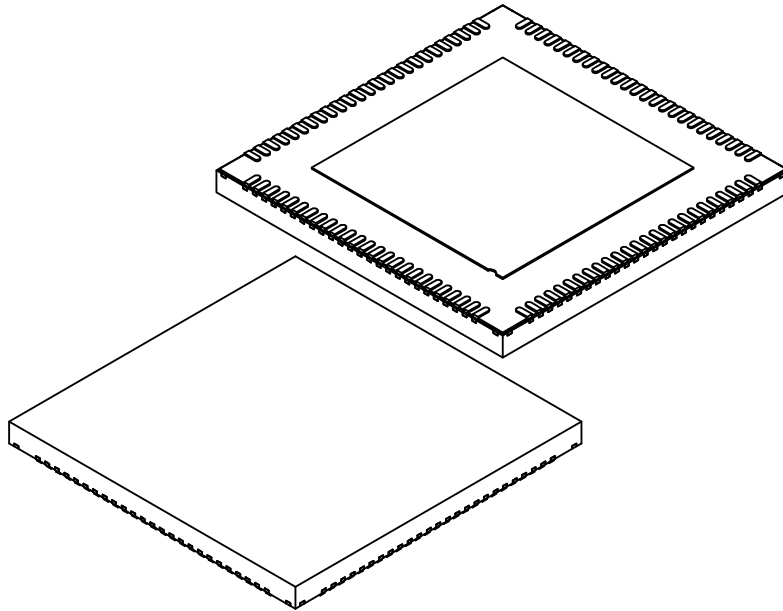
100-VQFN PACKAGE (DIMENSIONS)
